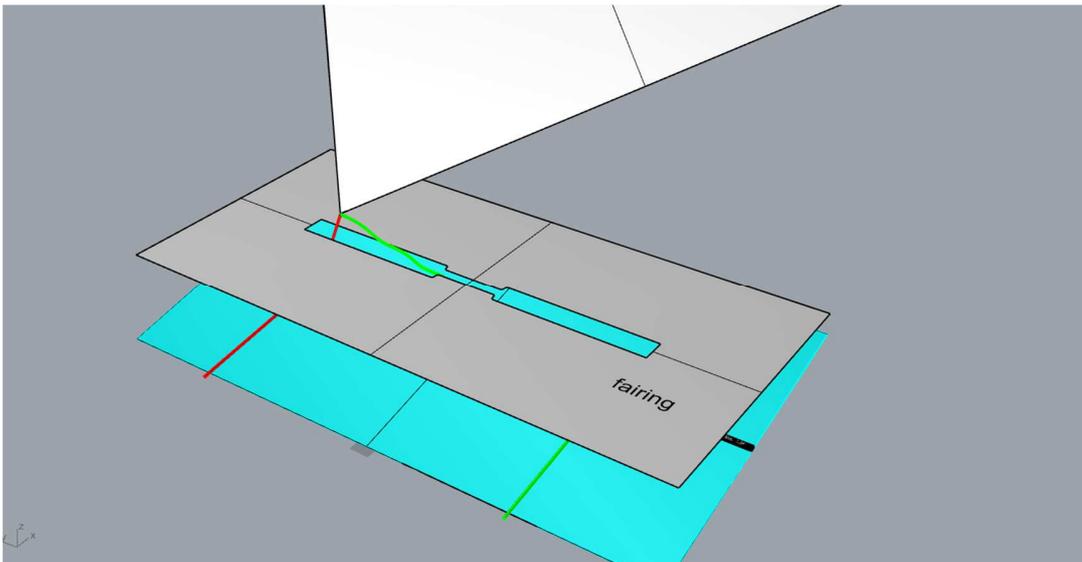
System B: As System A, fairing added with slot for jib sheets (grey).
